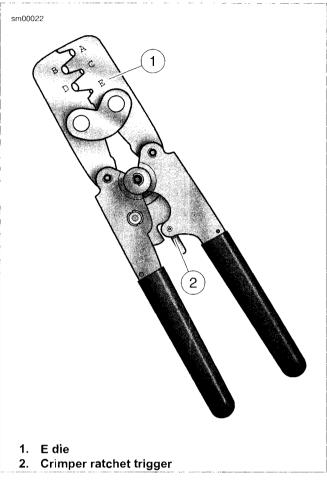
Packard Terminal Crimper (HD-38125-7)
